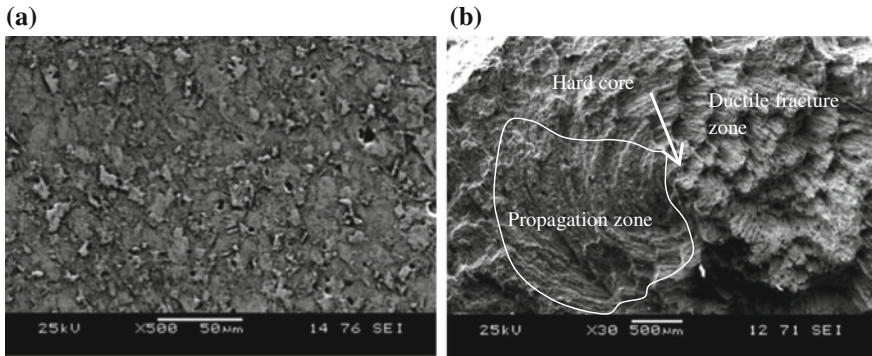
SEM photographic analysis for welding core and fracture surface (specimen of 8 mm, X5), a Welding core, fine grains, b fracture surface of tensile test
